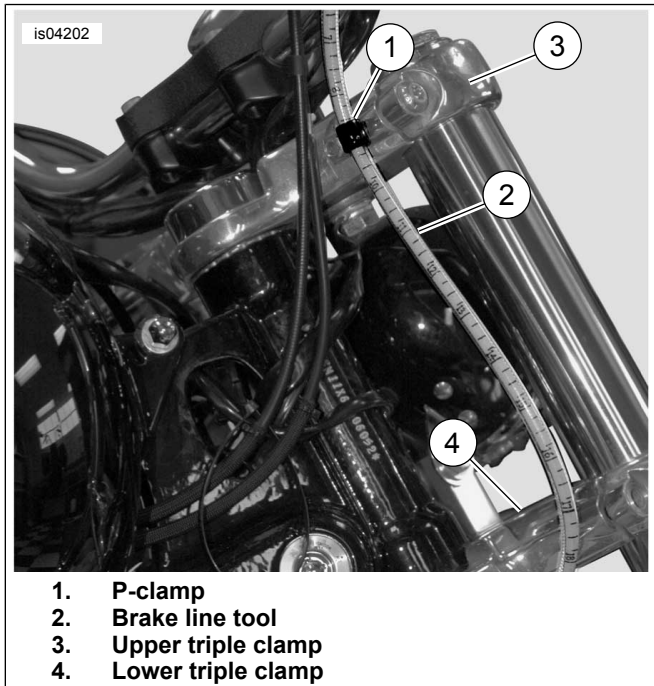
Brake Line Tool Handlebar Routing (FL Softail and Dyna Shown)
